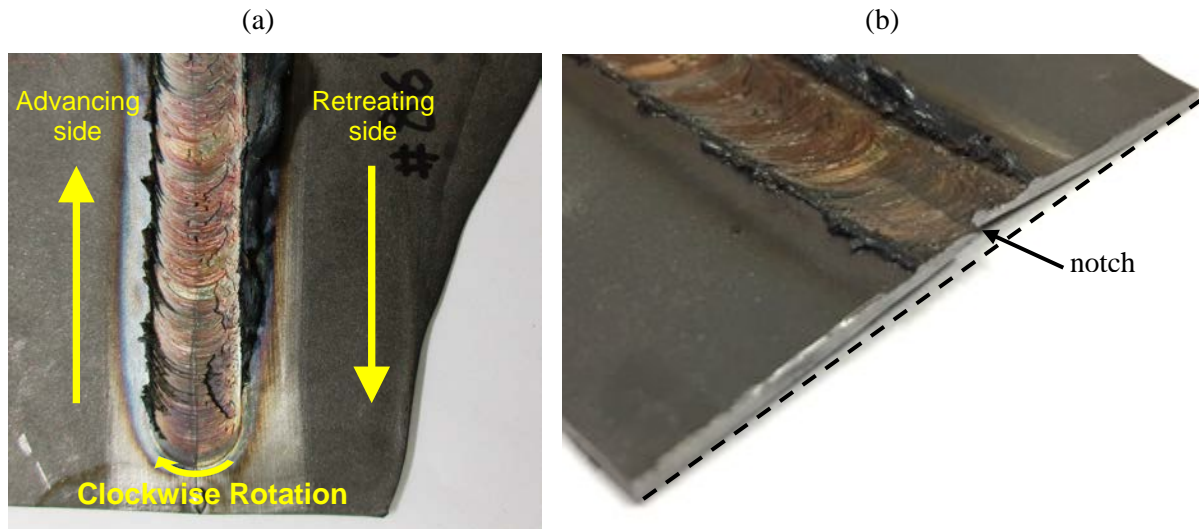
Optical images showing the butt joint weld zone produced by FSW between two halves of the 1.0 mm thick plates of 14YWT. (a) Viewed normal to the butt joint and (b) viewed at an oblique view of the butt joint.
